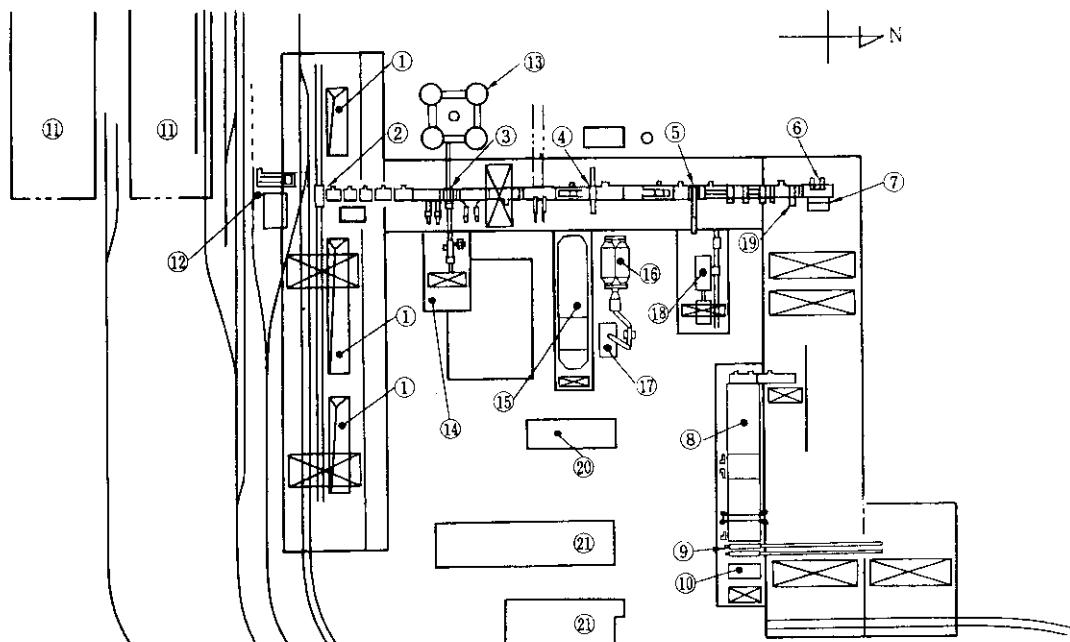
Layout of No.3 slabbing mill at Chiba Works
